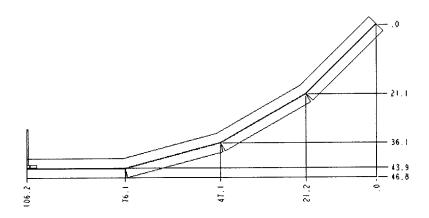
Side view of 1999 Contest Table. Dimensions in inches.
